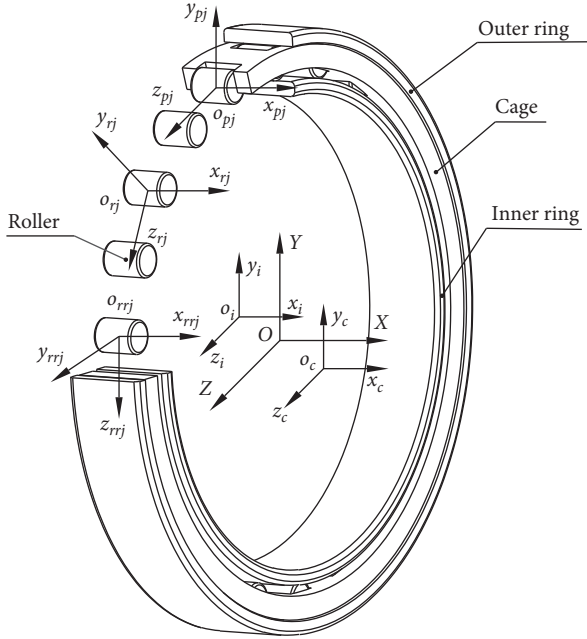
Coordinate systems of the cylindrical roller bearing.
